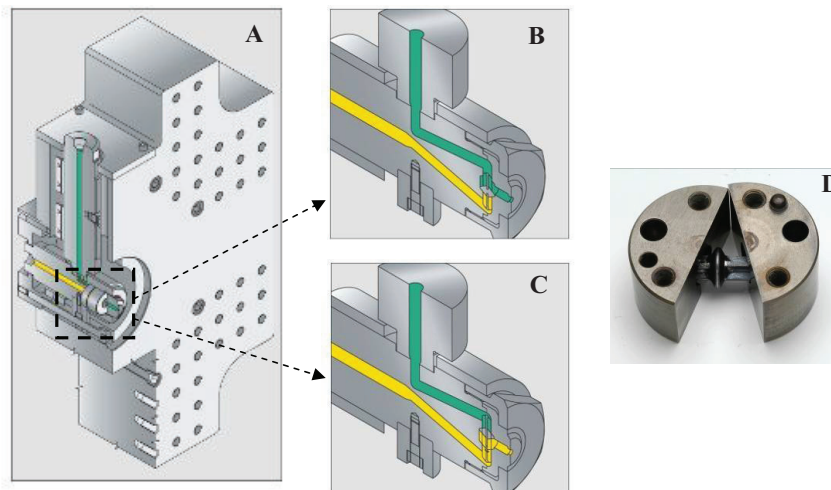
(A) Construction of the interval unit. (B) Injection of the vertical component. (C) Injection of the horizontal component. [118] (D) Photo of the switch-valve with internal piece.
